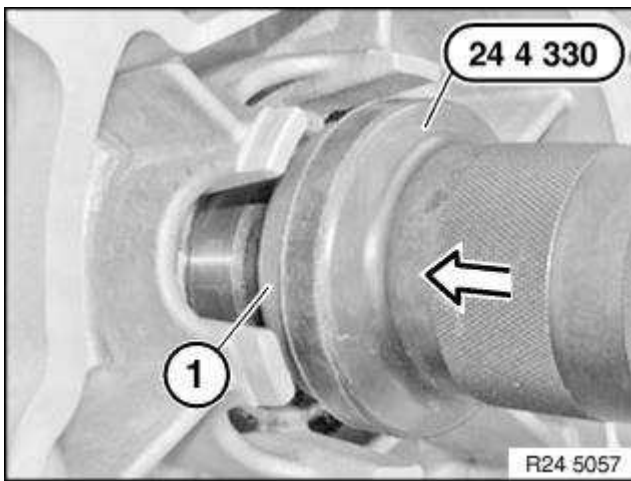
Drive In Radial Shaft Seal With Special Tool 24 4 330
